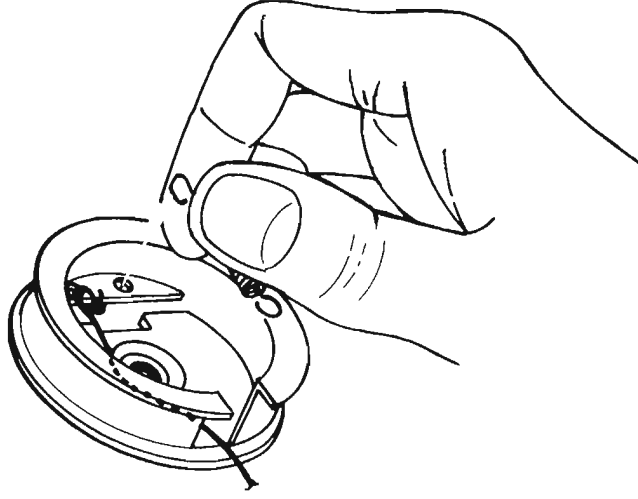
Dial Cord Stringing Start and Finish Point
